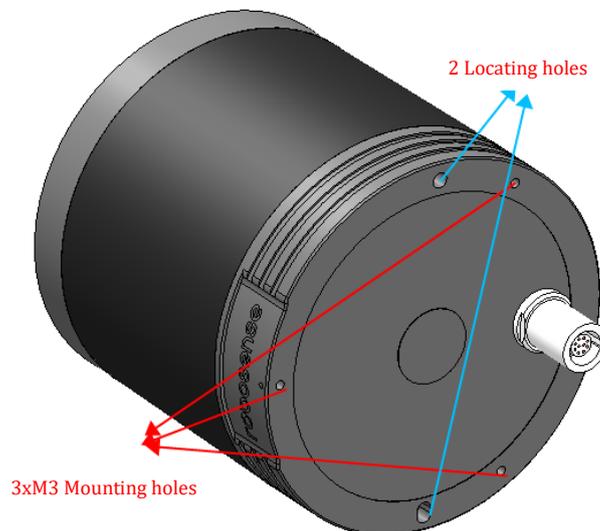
LiDAR Mounting Holes & Locating Holes Diagram
